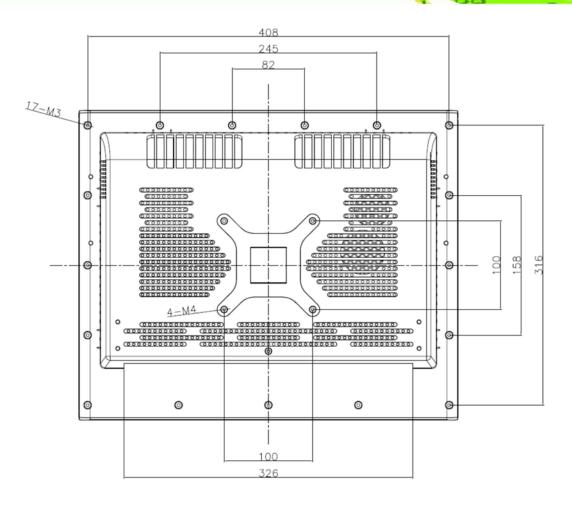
AFL-17B-915 Rear Dimensions (units in mm)
